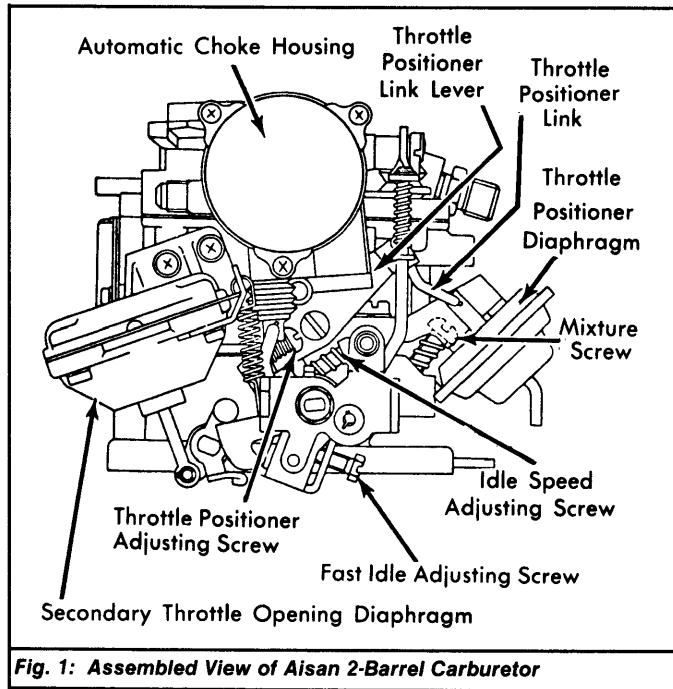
Assembled View of Aisan 2-Barrel Carburetor
